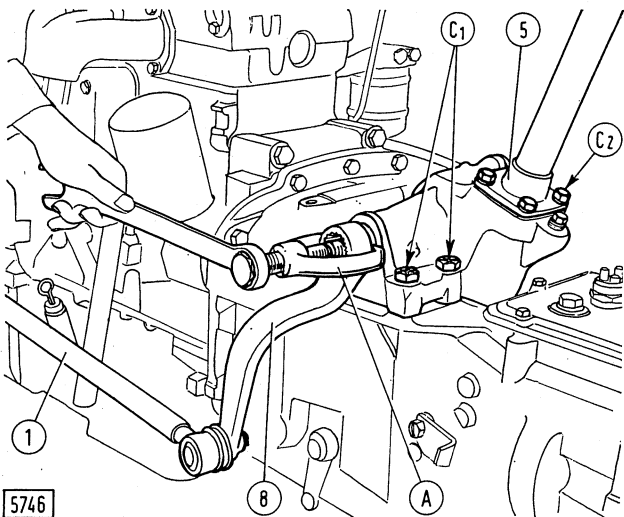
Removing the steering arm (8) from the steering box nut shaft by the puller A 443018 (A).
